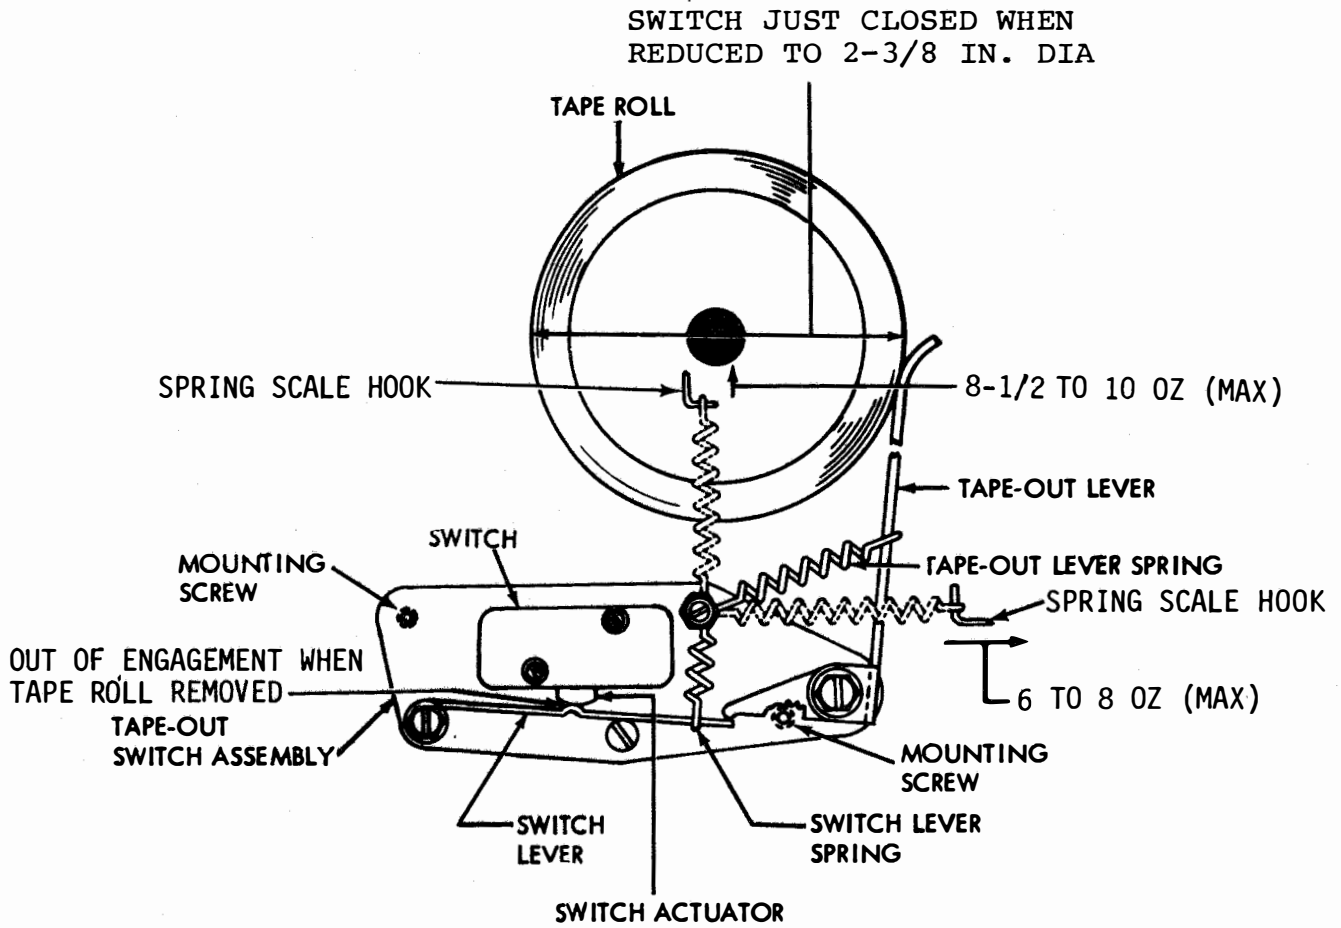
Tape-Out Switch Assembly, Switch Lever Spring, Tape-Out Lever Spring, and Tape-Out Lever
